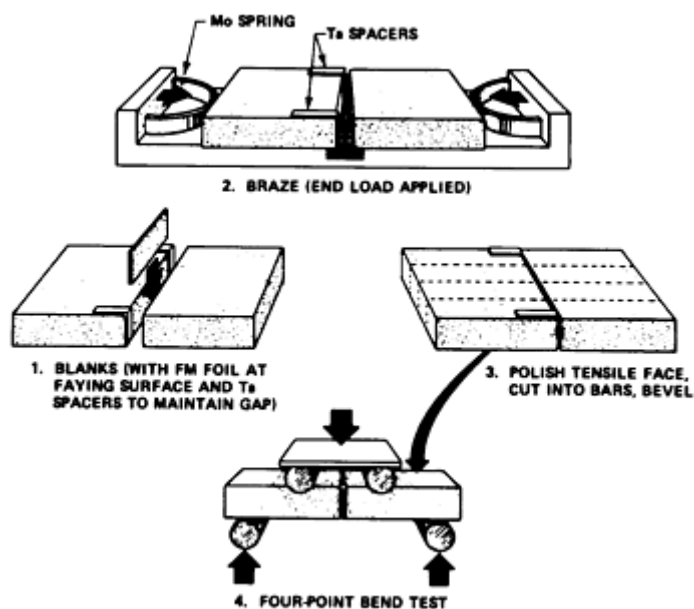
SEQUENCE OF OPERATIONS FOR FABRICATING BRAZED FLEXURAL BARS FOR THREE- OR FOUR-POINT BENDING TESTS
